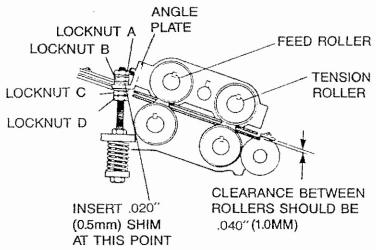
FIGURE ²⁶. ADJUSTING FEED AND TENSION ROLLERS
